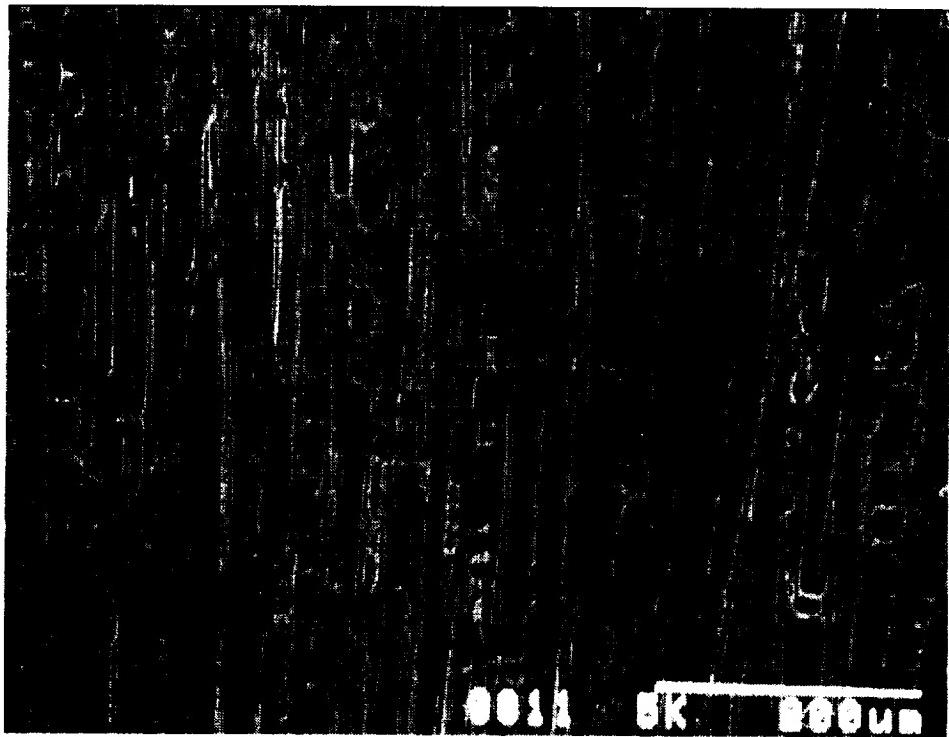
Surface Fracture of 10 second Weld at 1.25kW, 120kHz and 0.689Mpa.
